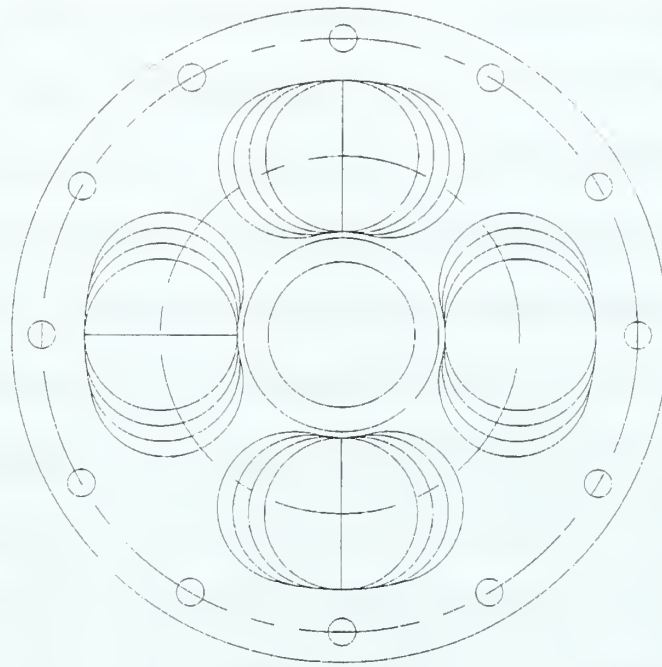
Valveless Pulse Detonation Engine Manifold Flange.
